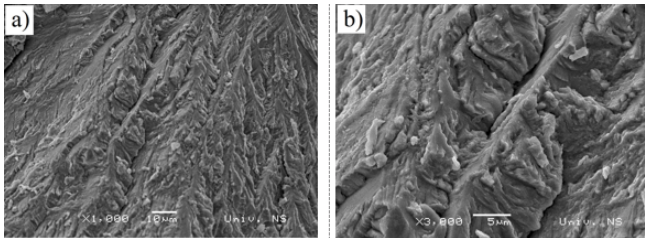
SEM fractography at 6.5 mm from the fatigue crack starting point.
